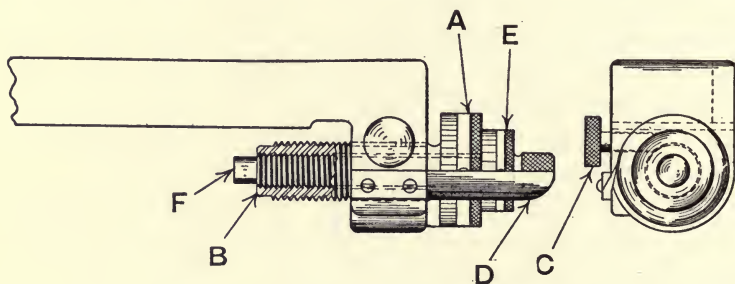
ADJUSTABLE STOP OF BESLY GRINDER
